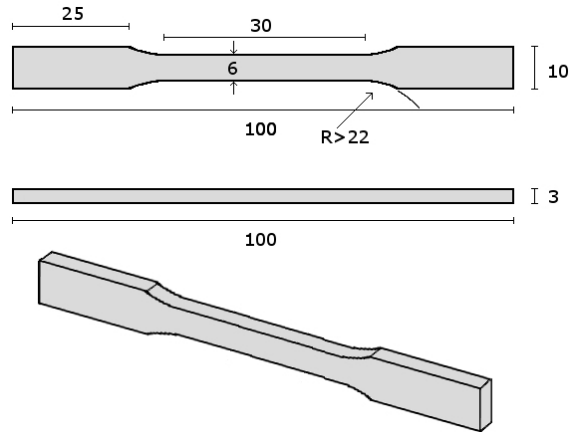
Dimensions of the 25 first tensile specimens used for testing of weld simulated and base material .
